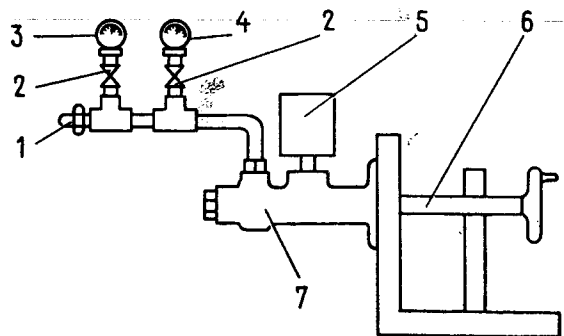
Checking Front Sealing Ring for Tightness:
